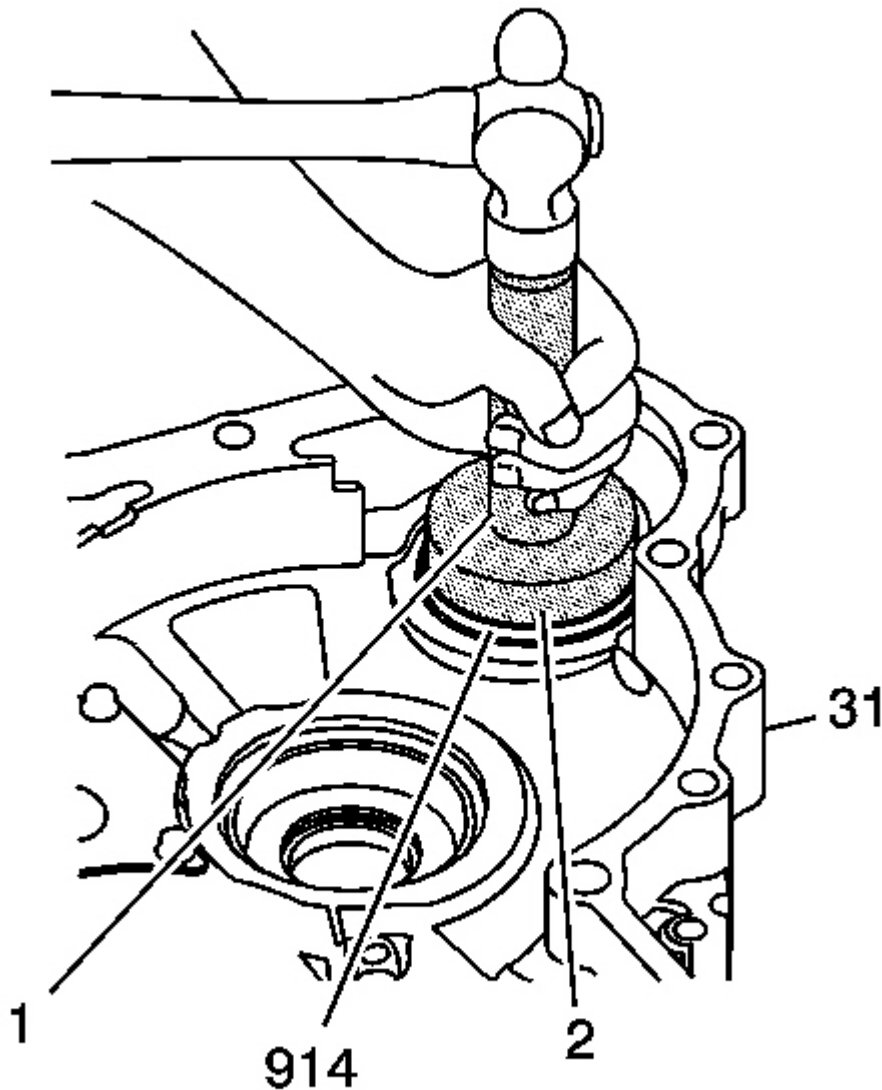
Installing The Transfer Case Input Gear Bearing Using DT 46415 & EN 46342
